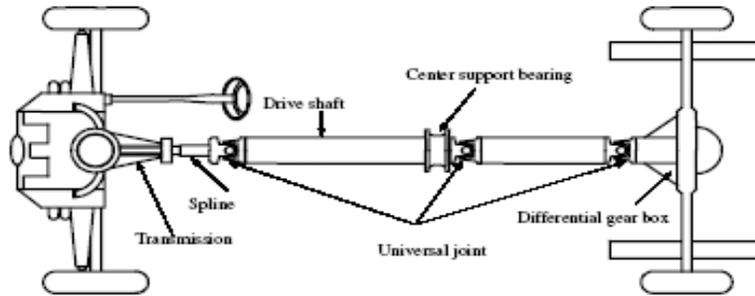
Conventional Two-Piece Drive Shaft for Rear Wheel Driving System
